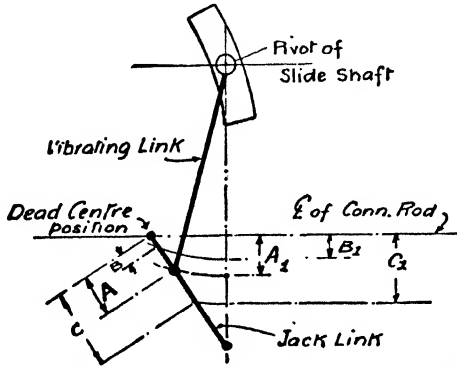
Method of Setting out Connecting Links of Joy's Valve Gear.
